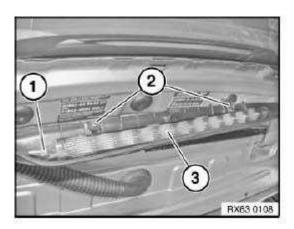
Identifying Plug Connection And Light Unit Courtesy of BMW OF NORTH AMERICA, INC.
